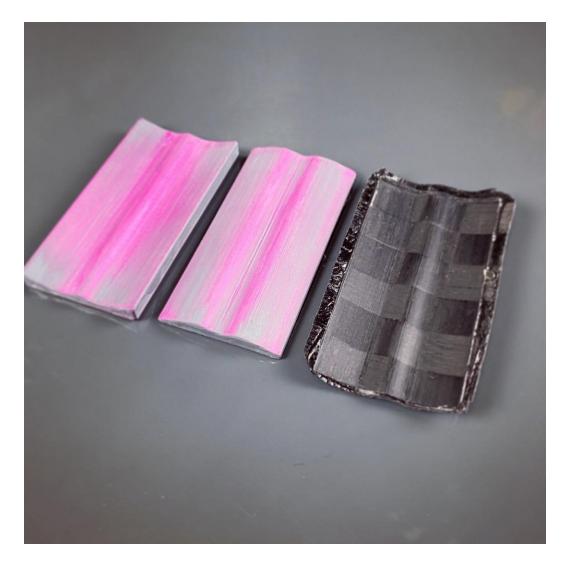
3D printed molds used for making contoured throwing blades along with the finished carbon fiber piece.
